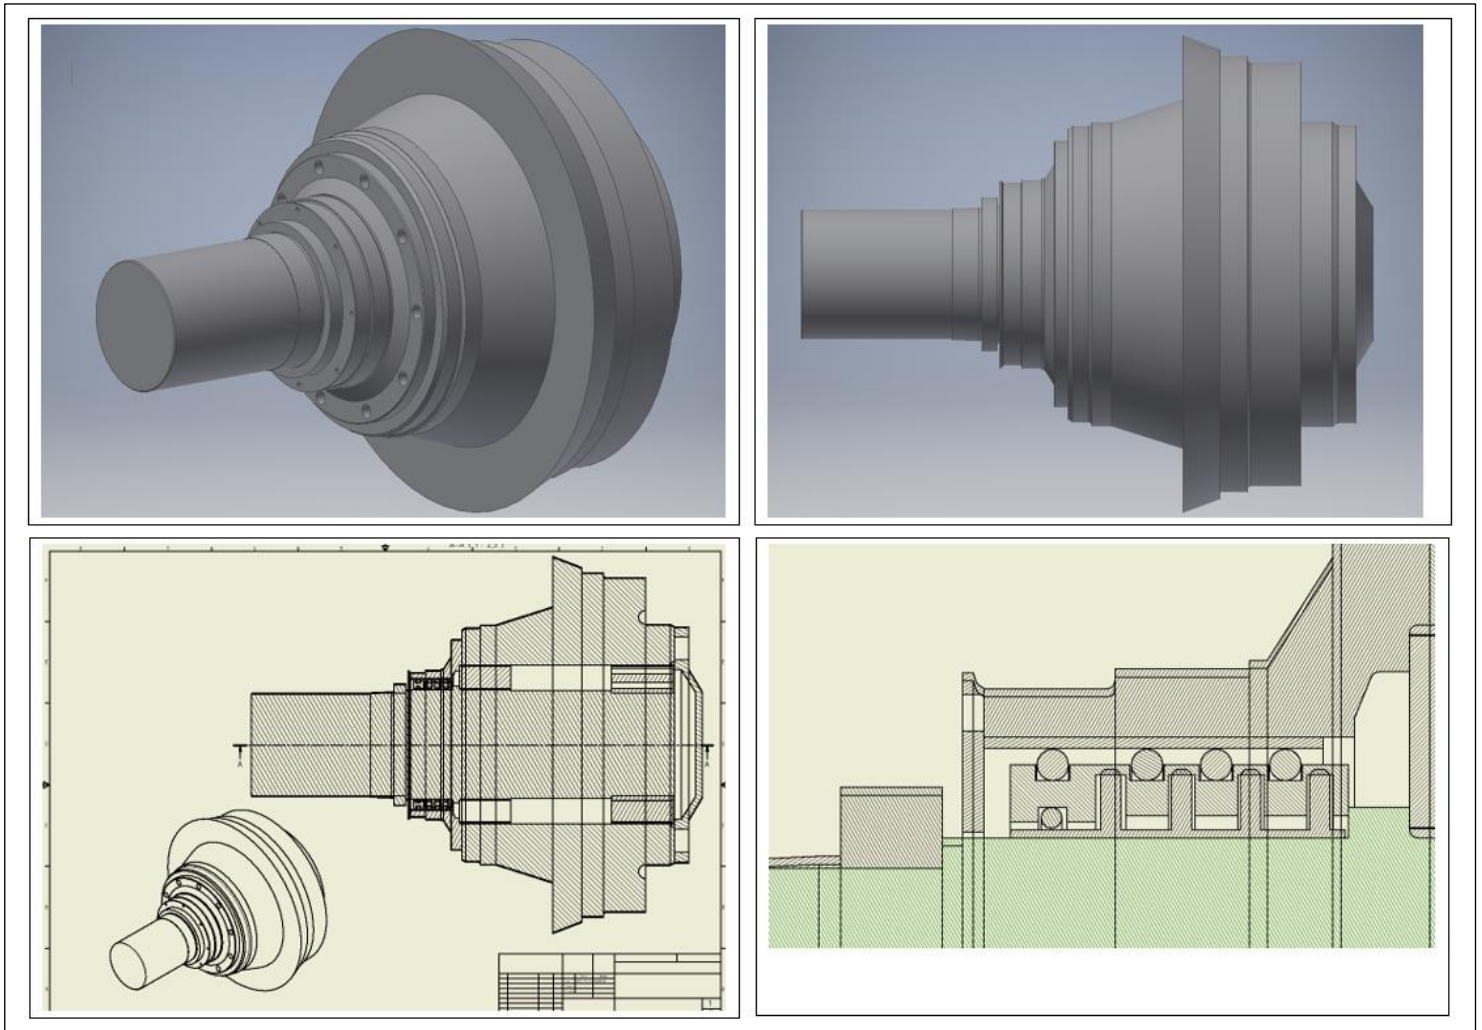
Concept 4 - Continuous O-rings with a spring system.
